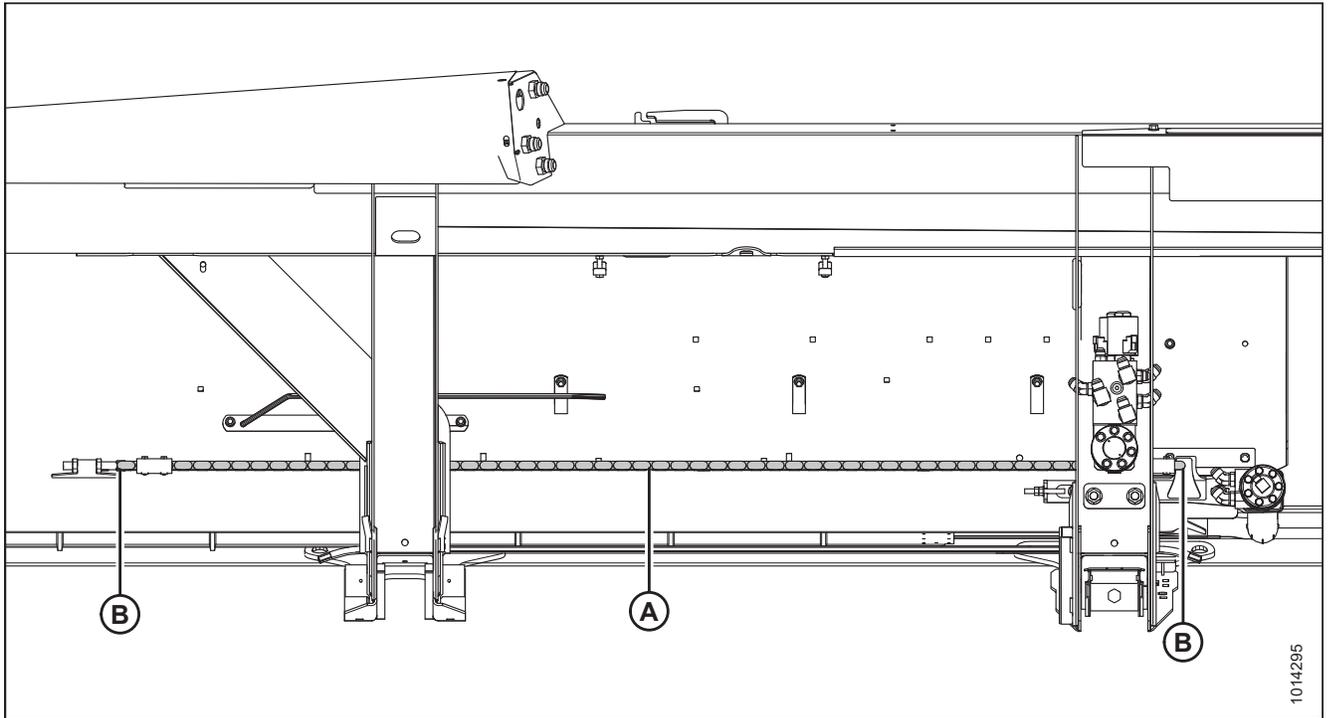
Chain Adjustment Bolt – Left Shown, Right Similar
